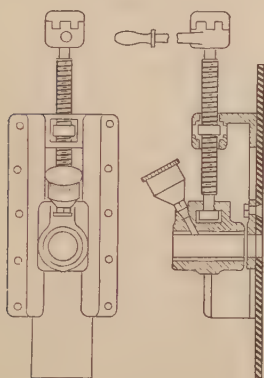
Take-up with Dust-seal for Steel or Wood Boot.
